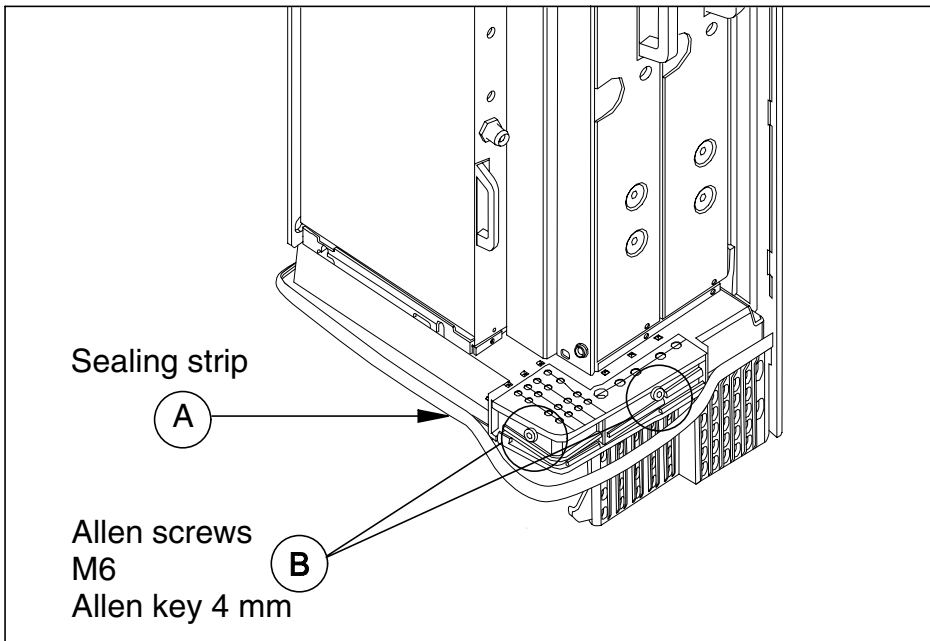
Displacing the sealing strip and removing the cable entry block screws
